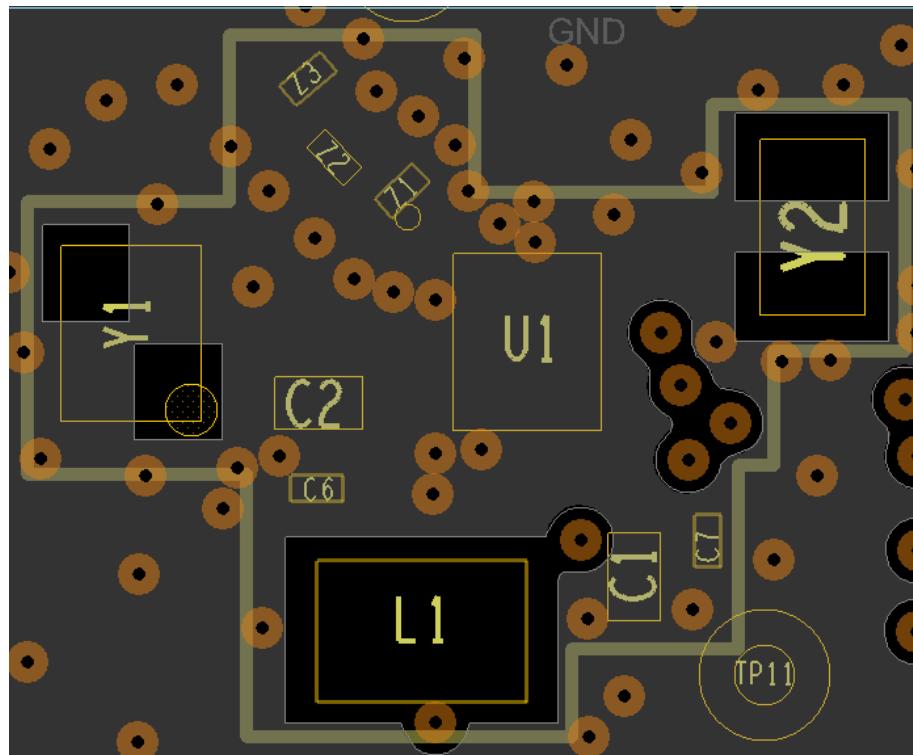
WLCSP17 PCB Placement and Routing – GND plane - INT1 Layer
